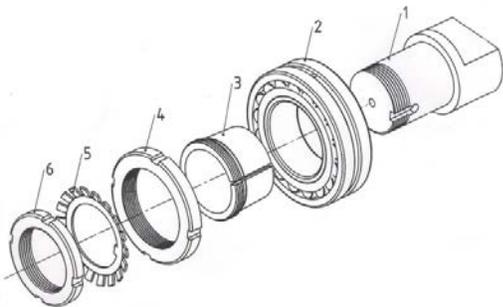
The exploded view of the training kit on mounting and dismounting of roller bearing onto and from shaft using withdrawal sleeve (part no.3)
